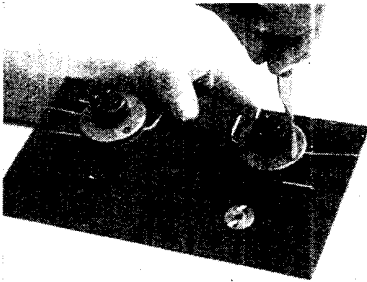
Connexions to the valve holders should be made before mounting them to the panel
